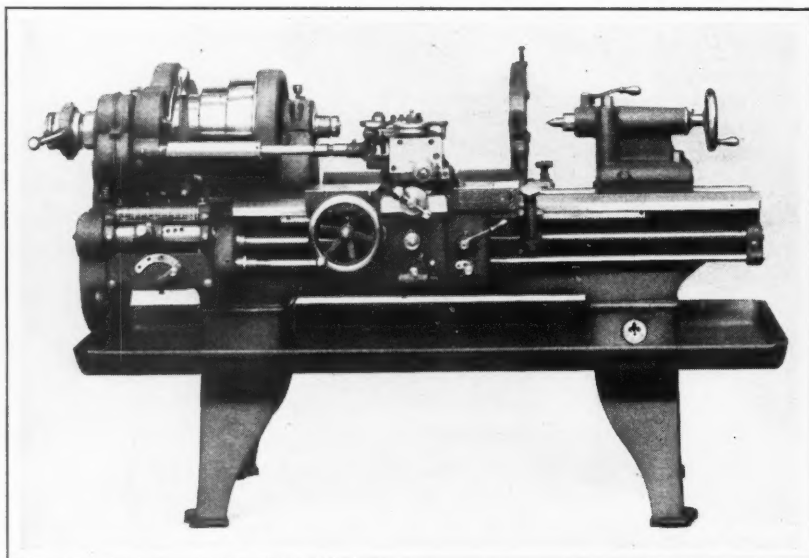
LeBlond Fifteen-inch Heavy-duty Tool-room Lathe
